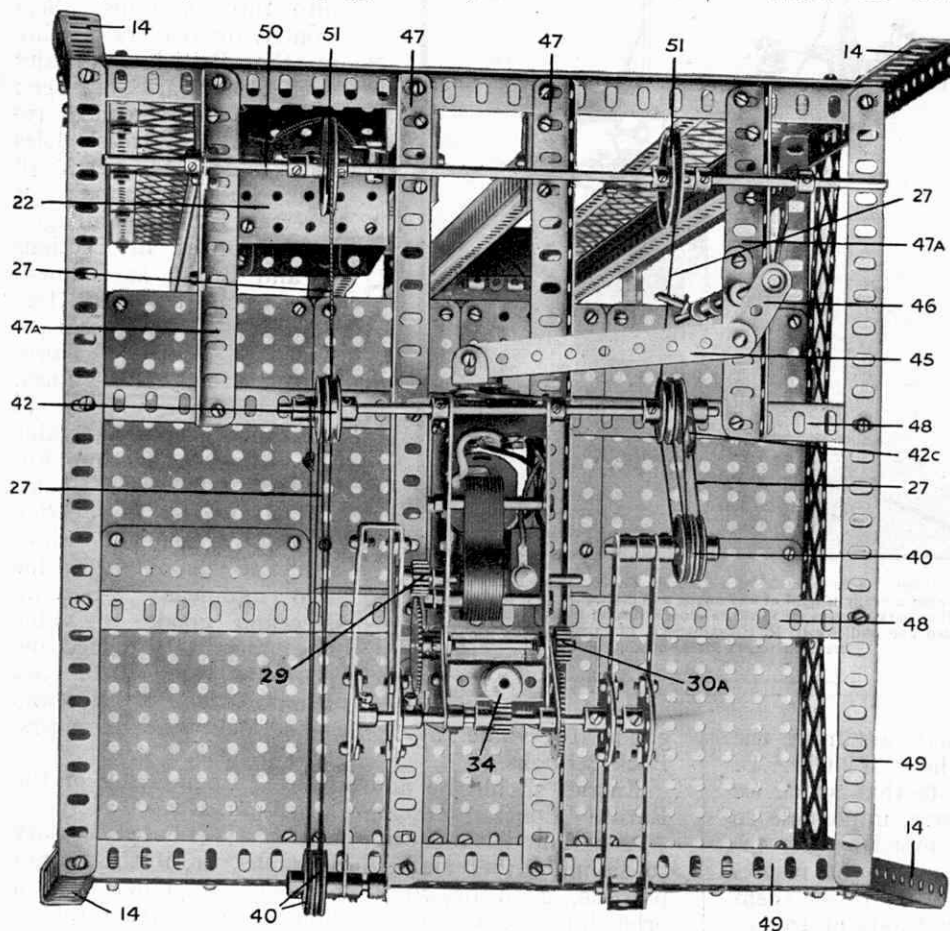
Plan view of the Top Floor of the Warehouse, showing the arrangement of the mechanism.
